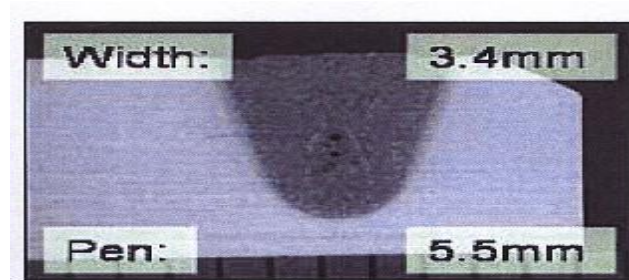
Wine-glass weld shape characteristic of Nd:YAG laser welding. Cross-sections at 0,75 m/min and 3,5 kW (Greses & Hilton, 2004)
